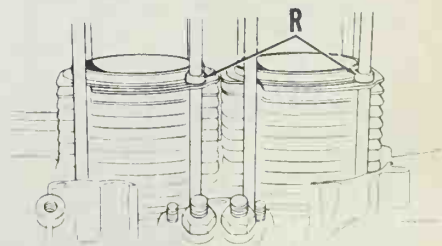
View showing location of rubber seals (R) on cylinder head studs.
